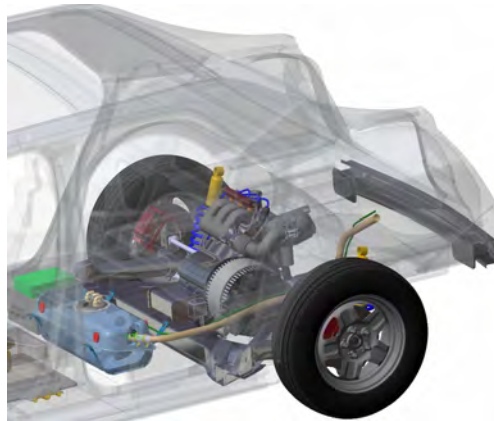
FSV-2 PHEV₄₀ engine/generator set packaging
